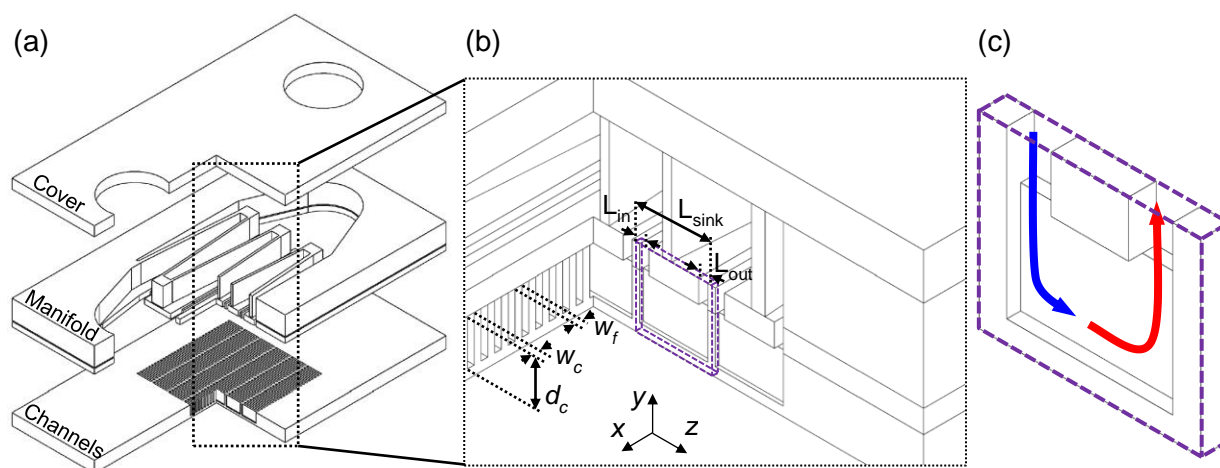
(a) Exploded view of a manifold microchannel (MMC) heat sink with a quarter-section removed, (b) the same MMC heat sink with the critical channel dimensions labeled, and (c) the MMC unit cell with the flow inlet and outlet paths shown.
